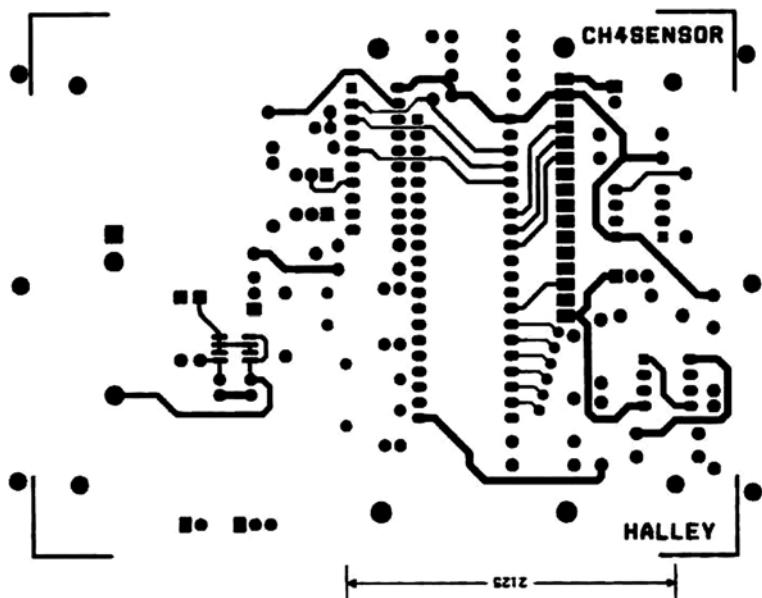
PCB (top) layout of sensor unit of CH₄-monitoring device
